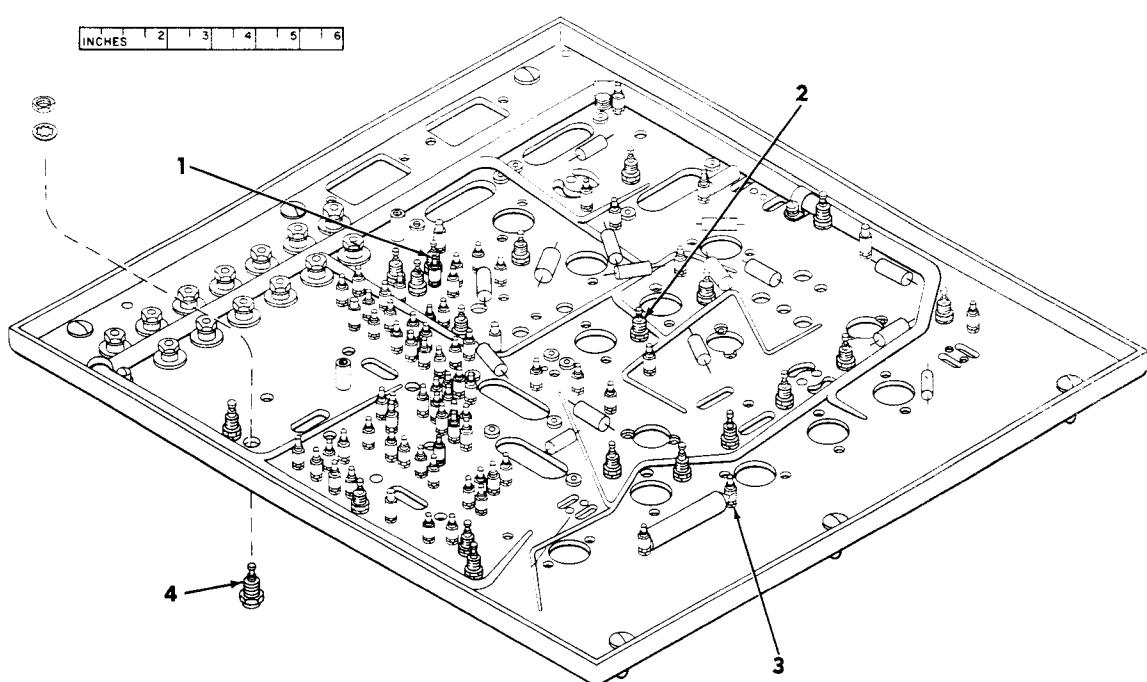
Synchronizer, electrical (9983937)—partial exploded view
